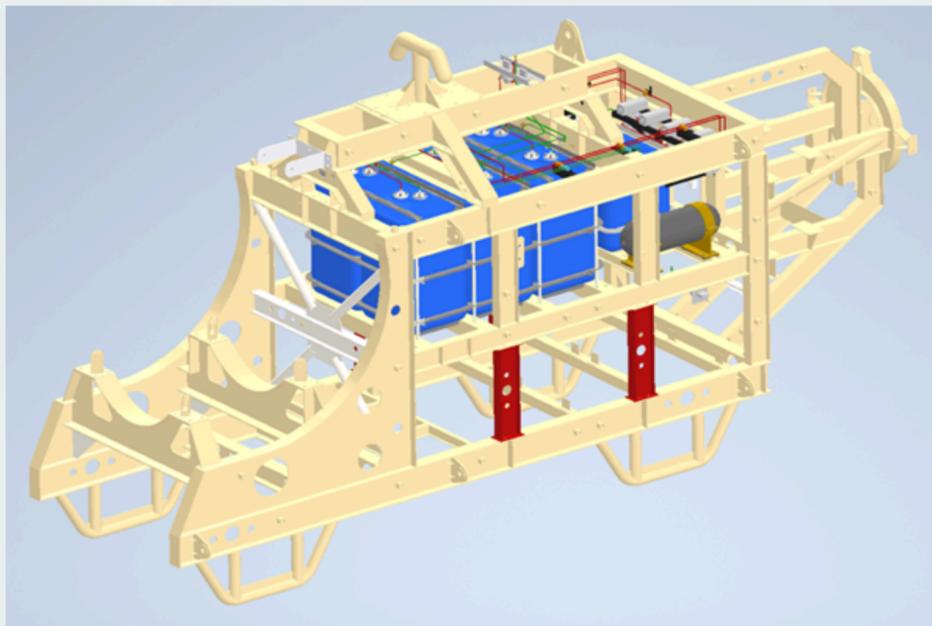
Integration of MBS in MATSYA 6000 base frame
